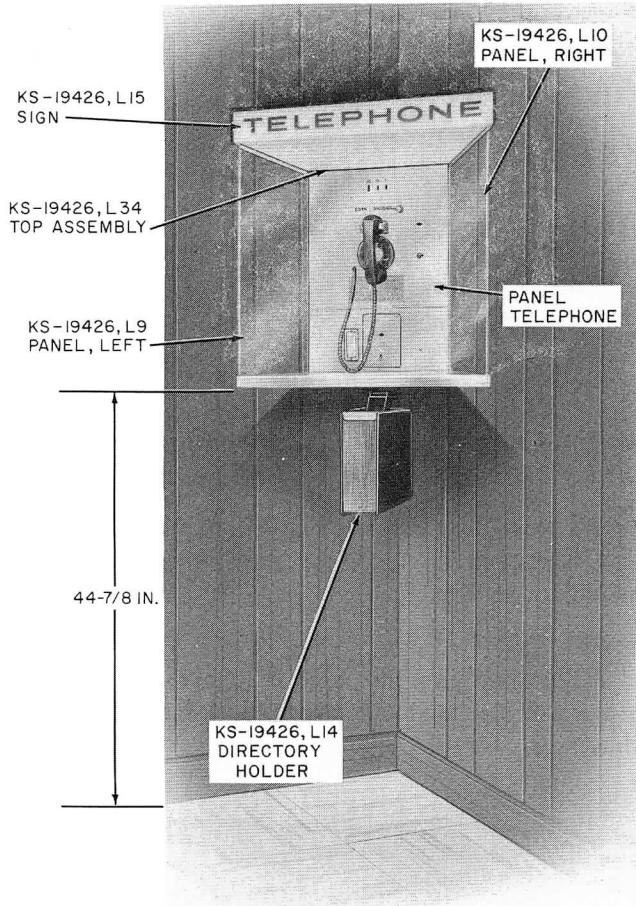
KS-19426 Mounting in Corner Using List 4 Support
